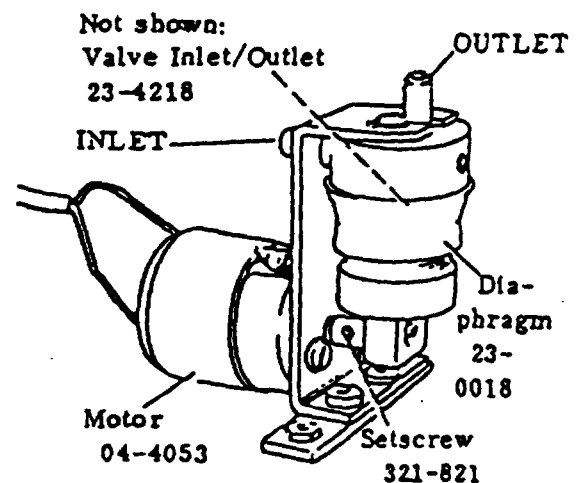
342-626 Sample Pump with motor and mounting bracket. Inlet and Outlet tubing connections shown.
